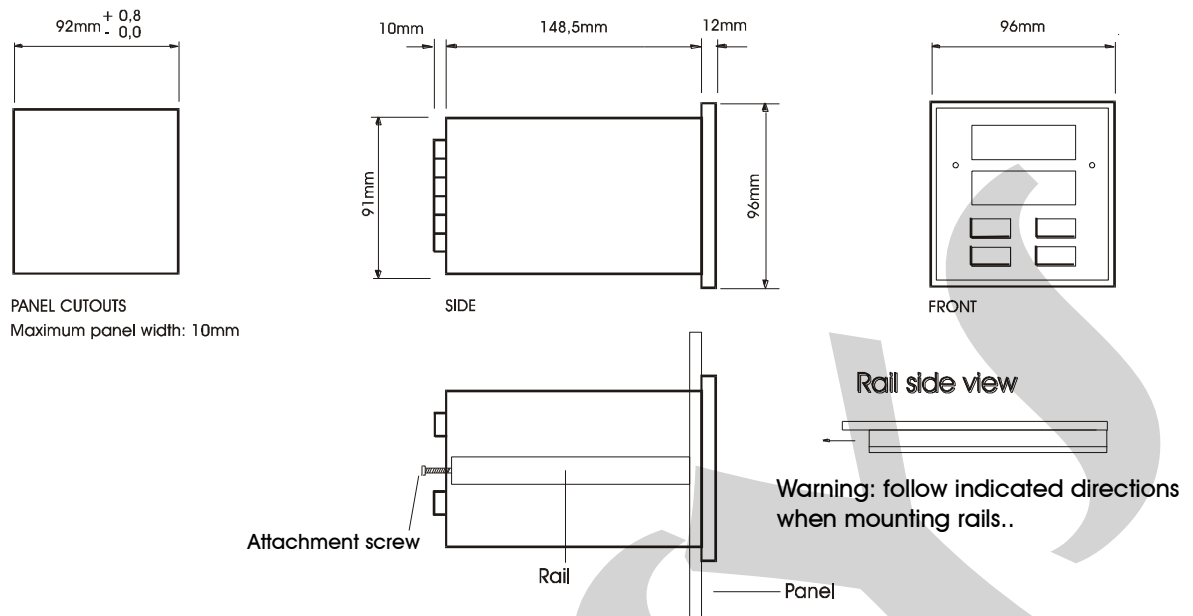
Dimensional drawing, panel mounting cutout and side view for DMY-2011 Indicator
